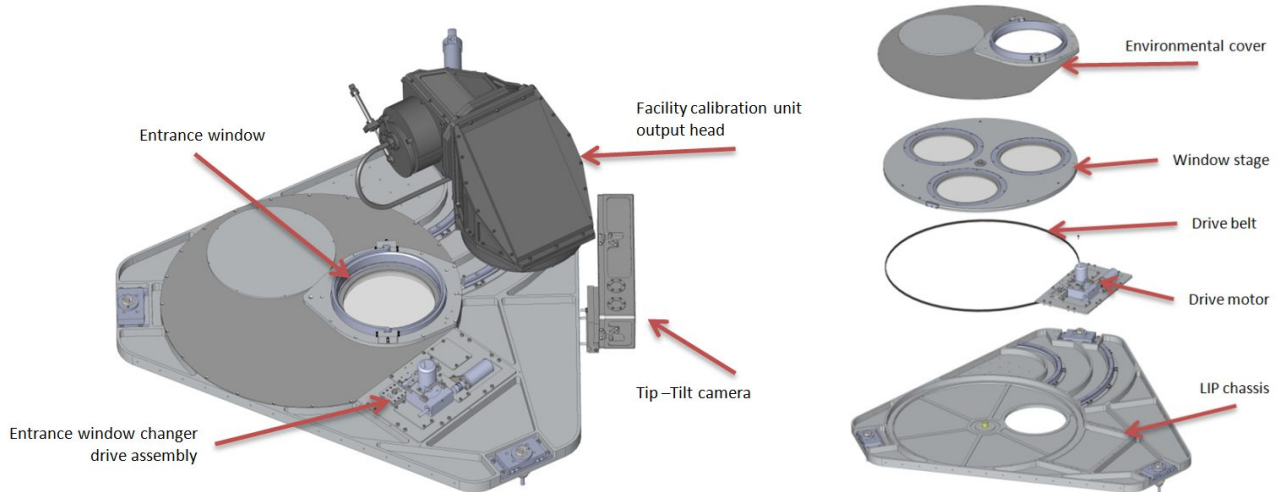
, left shows a rendering of the lower instrument package. Figure 23, right shows an exploded view of the entrance window assembly
